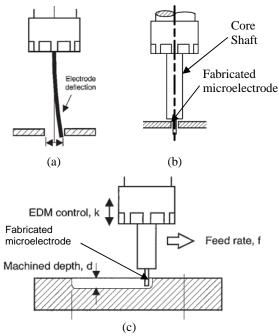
(a) Machining with longer electrodes introduces deflection due to low stiffness, (b) Micro-EDM drilling with on-machine fabricated microelectrode, (c) micromold fabrication using on-machine fabricated microelectrode.
